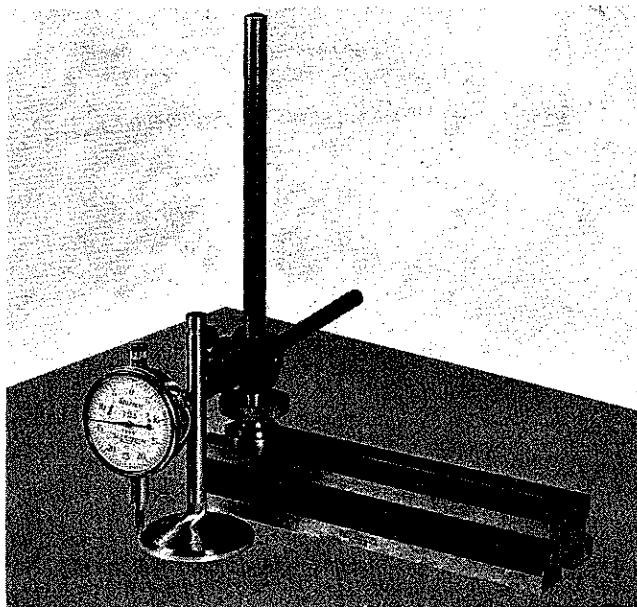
Method of Checking Valve Edge Thickness with Dial Indicator
